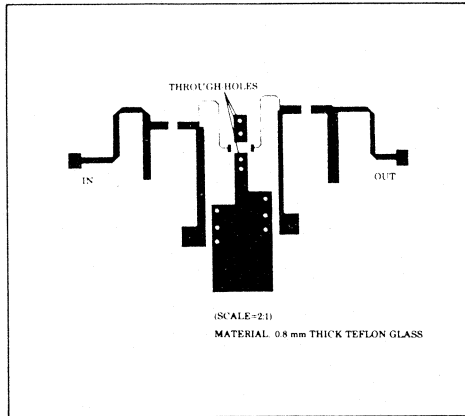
PCB Layout for 1.0-1.4 GHz Amplifier
